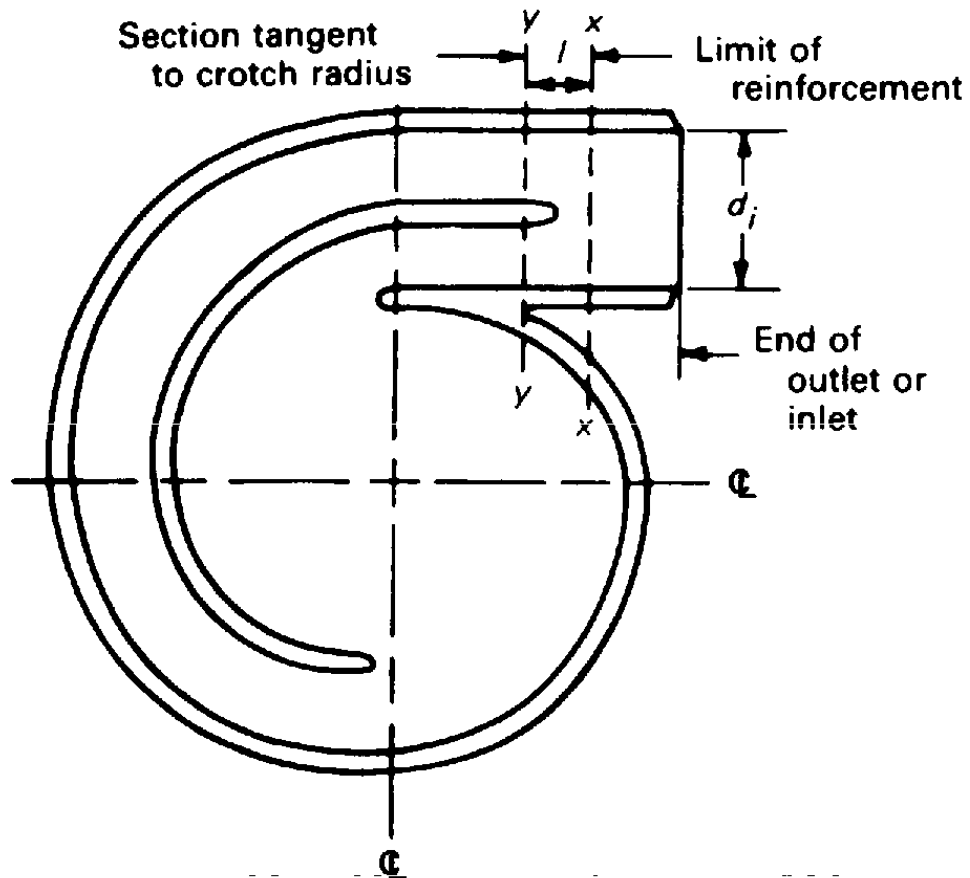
MINIMUM TANGENTIAL INLET AND OUTLET WALL THICKNESS
